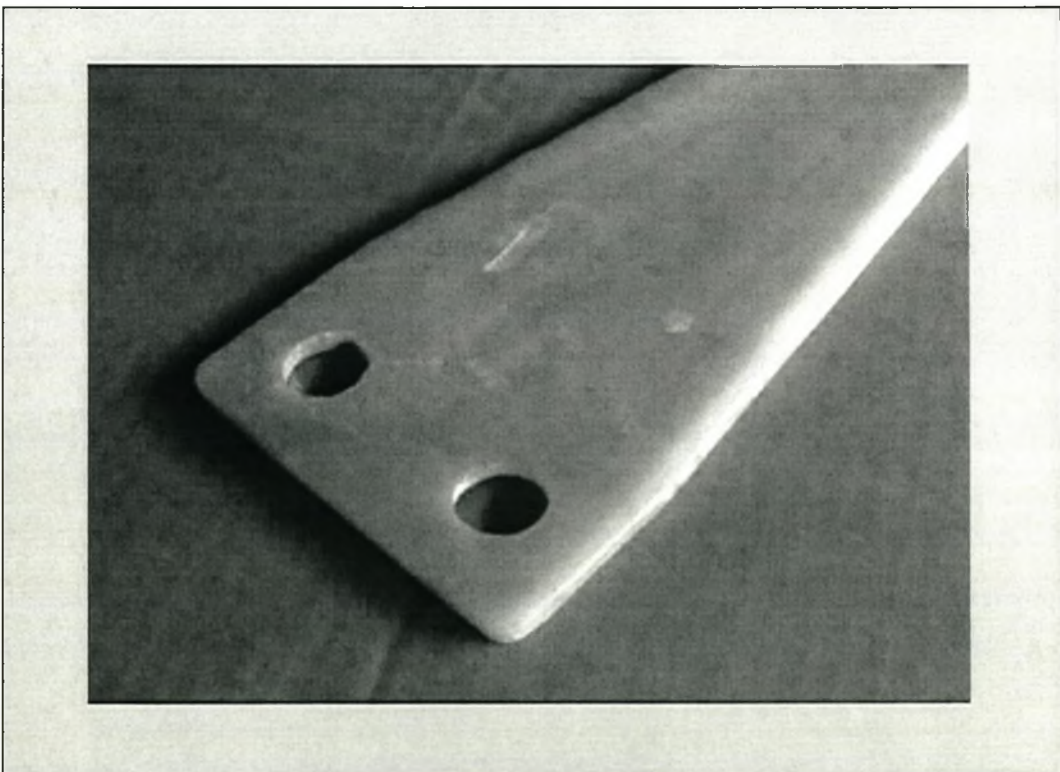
Close-up on drive-shaft side of half flexbeam
